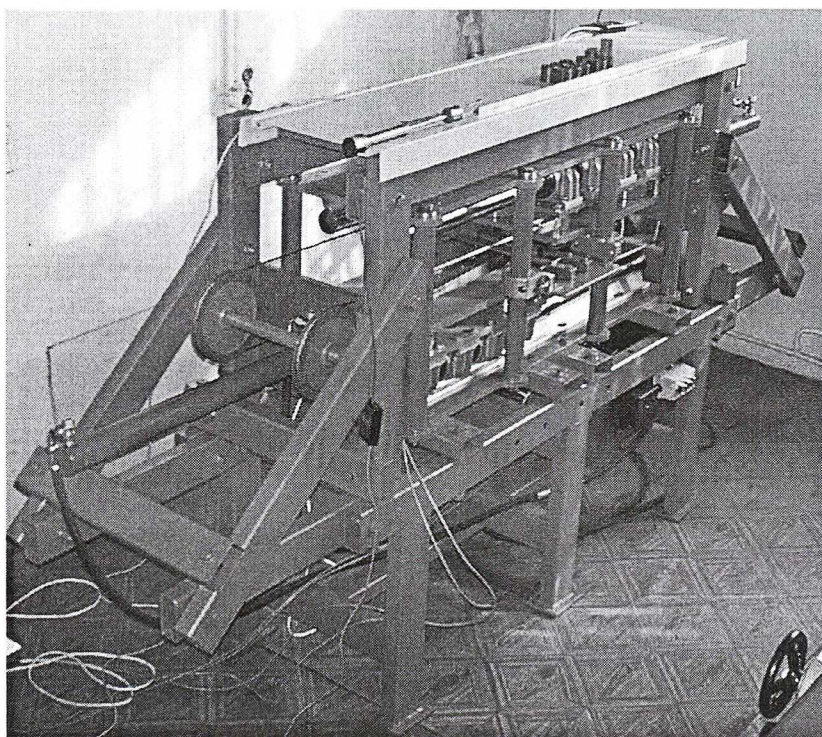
Laboratory flat-wedge rolling mill LUW-1
